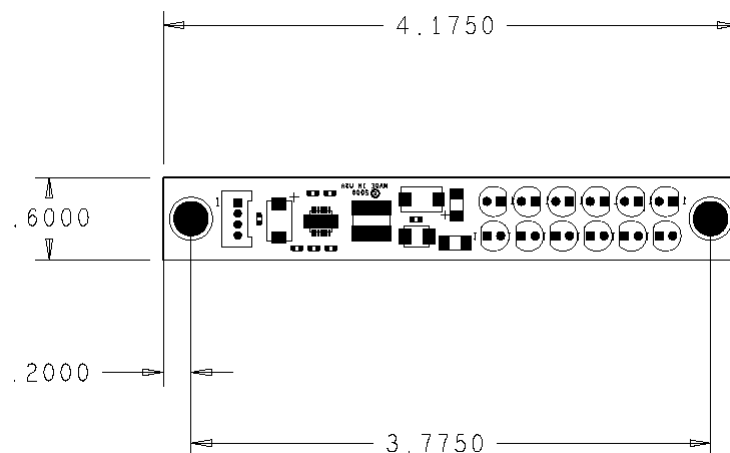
LED Driver and LED Circuit Board Dimensional Drawing (courtesy of Bill Cross).
